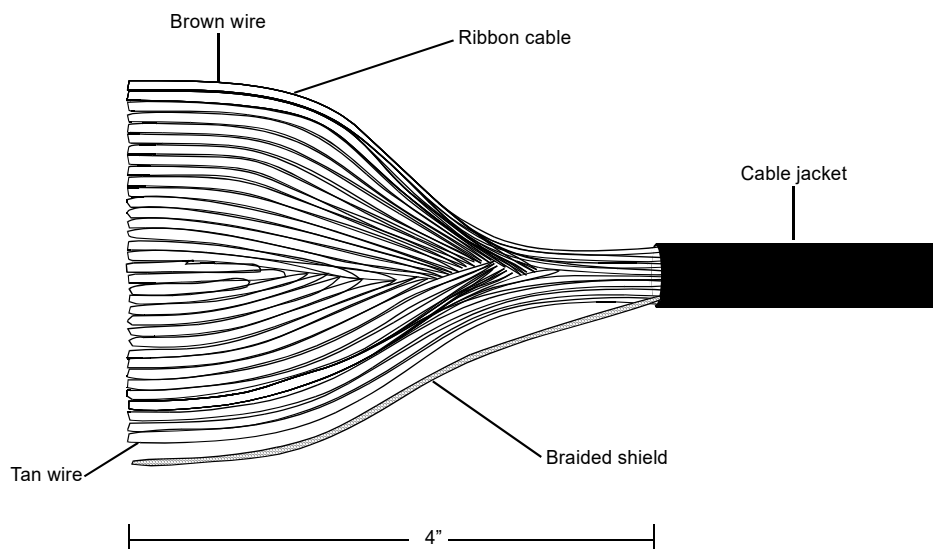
Display Cable Jacket with Ribbon Cable and Shield Exposed
